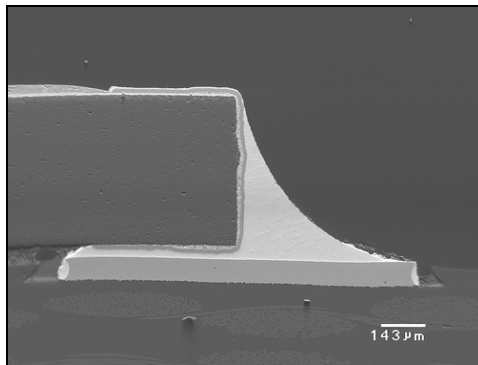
An ideal surface-mount device (SMD) soldering joint is shown here.
